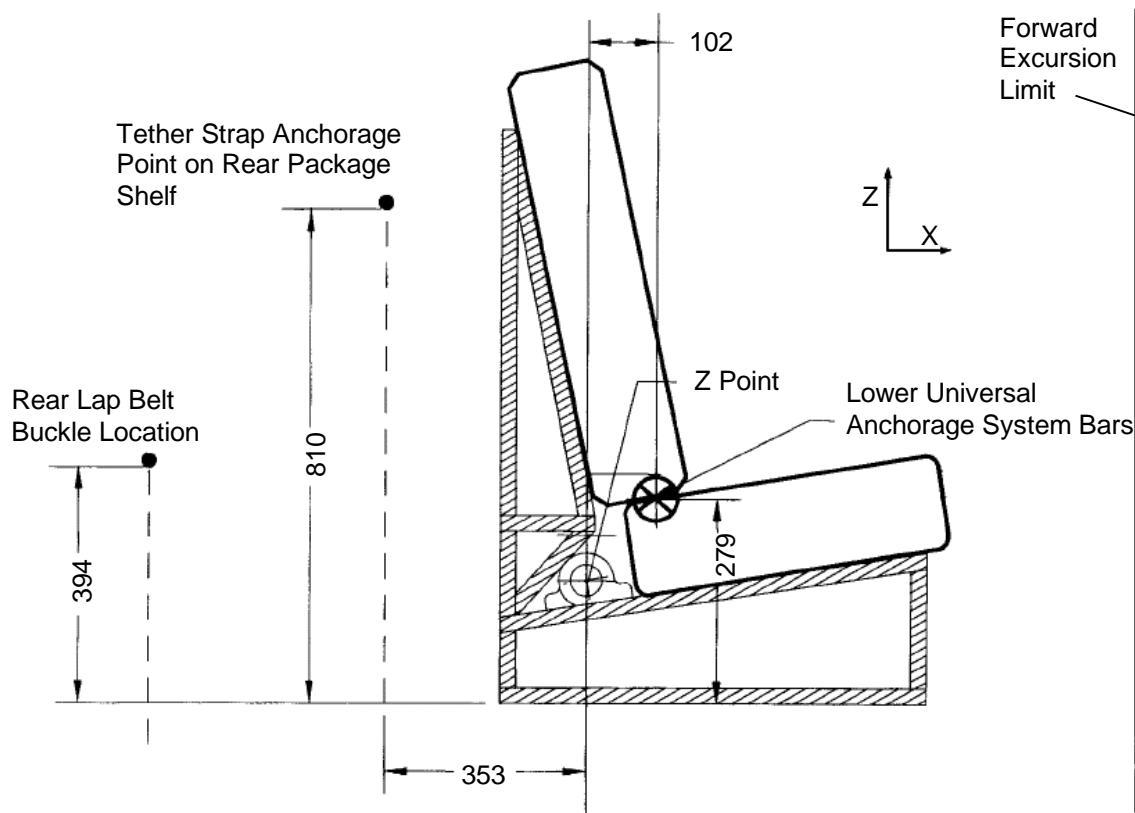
Side View of the Standard Seat Assembly Indicating the Location of the Seat Belt Anchorage Points
